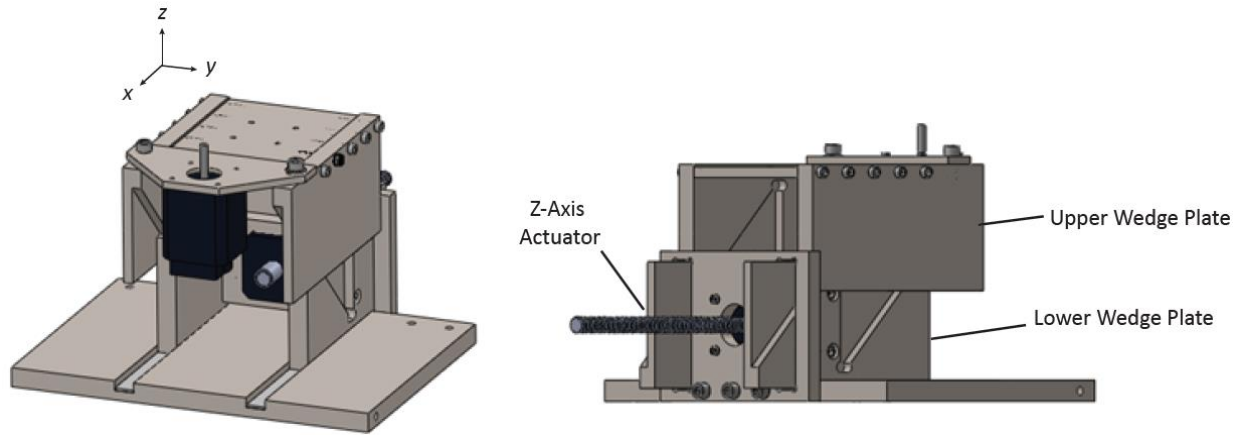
Detail of flexion-extension and valgus-varus motion control assembly
